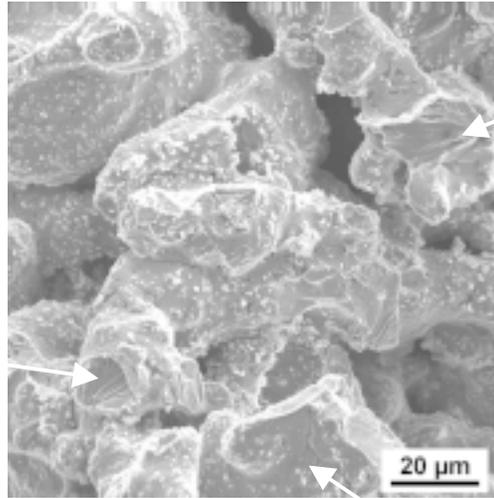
Fracture surfaces of as-fabricated FAS-Zr filter material showing transgranular failure through fully sintered material. Examples of such are indicated by arrows. Note lack of oxide particles on fracture surfaces.
